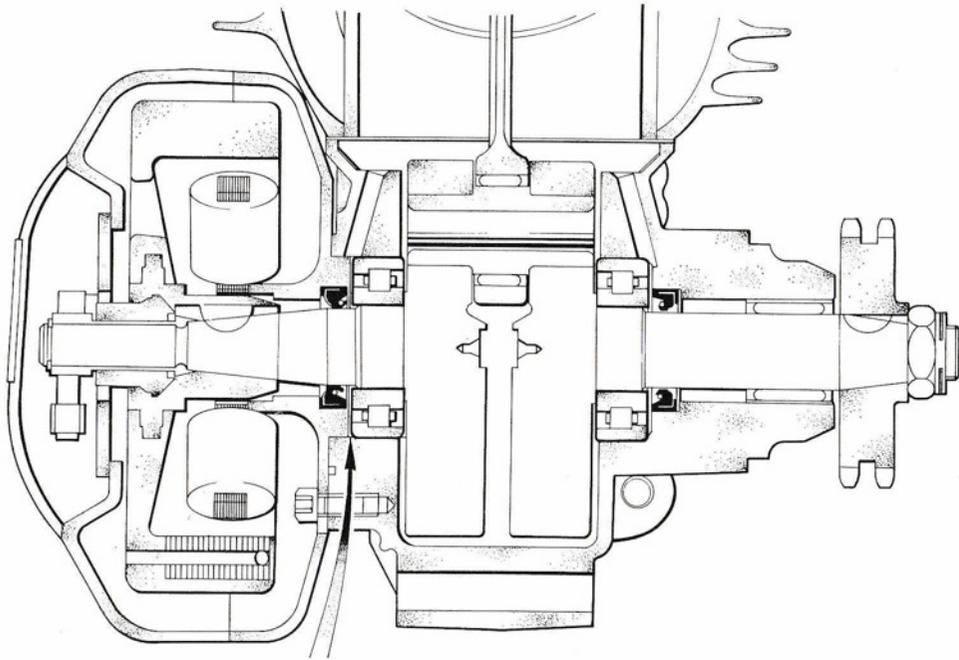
Diagram of crankshaft fitted in crankcases—arrow indicates point of shimming crankshaft and float.
